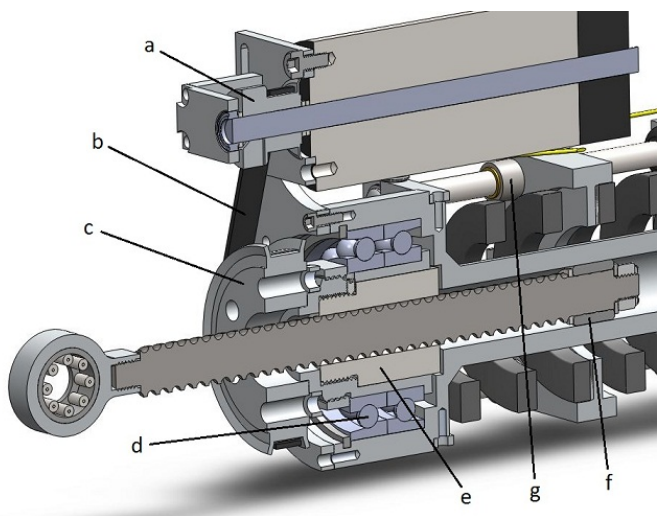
Cross section of the UT-SEA showing drivetrain components including: (a) small pulley (b) GT style belt (c) large pulley (d) angular-contact bearings (e) ballnut (f) piston-style ballscrew support (g) miniature ball bearing guides.
